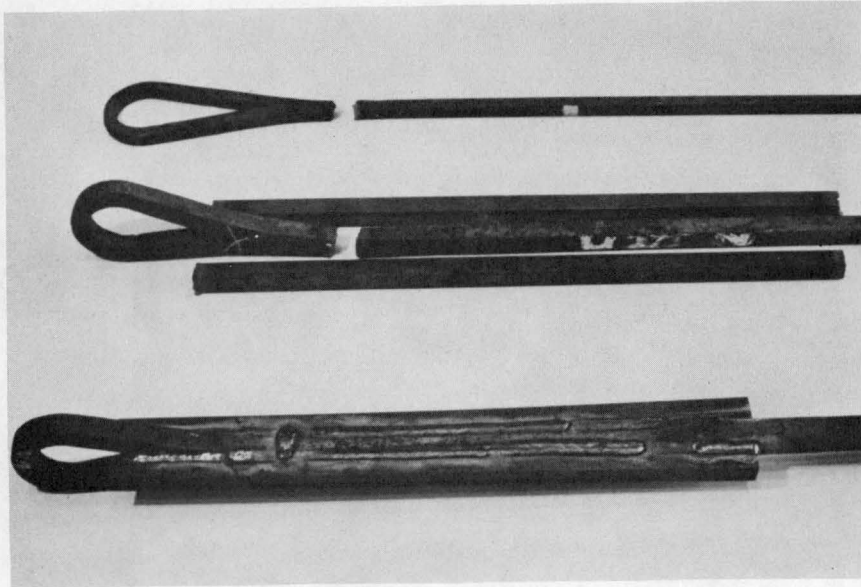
Photograph showing the repair for a fracture in the forging at the neck of an eye.
